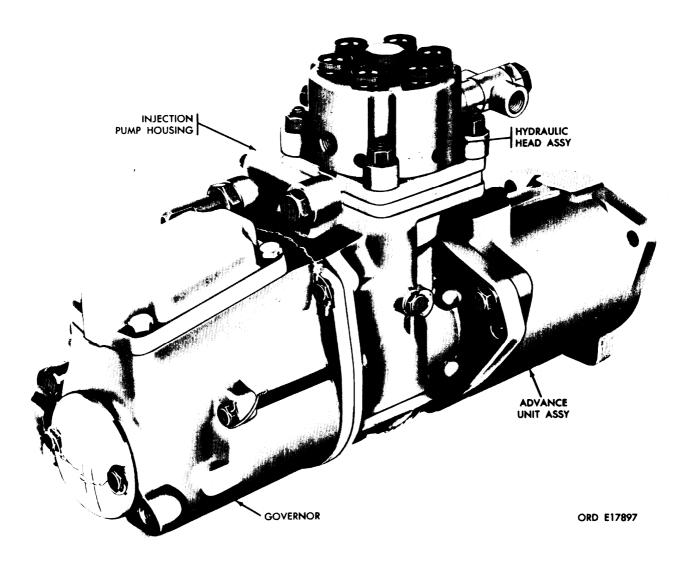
Typical metering and distributing fuel injection pump assembly (early code G), right rear view.
